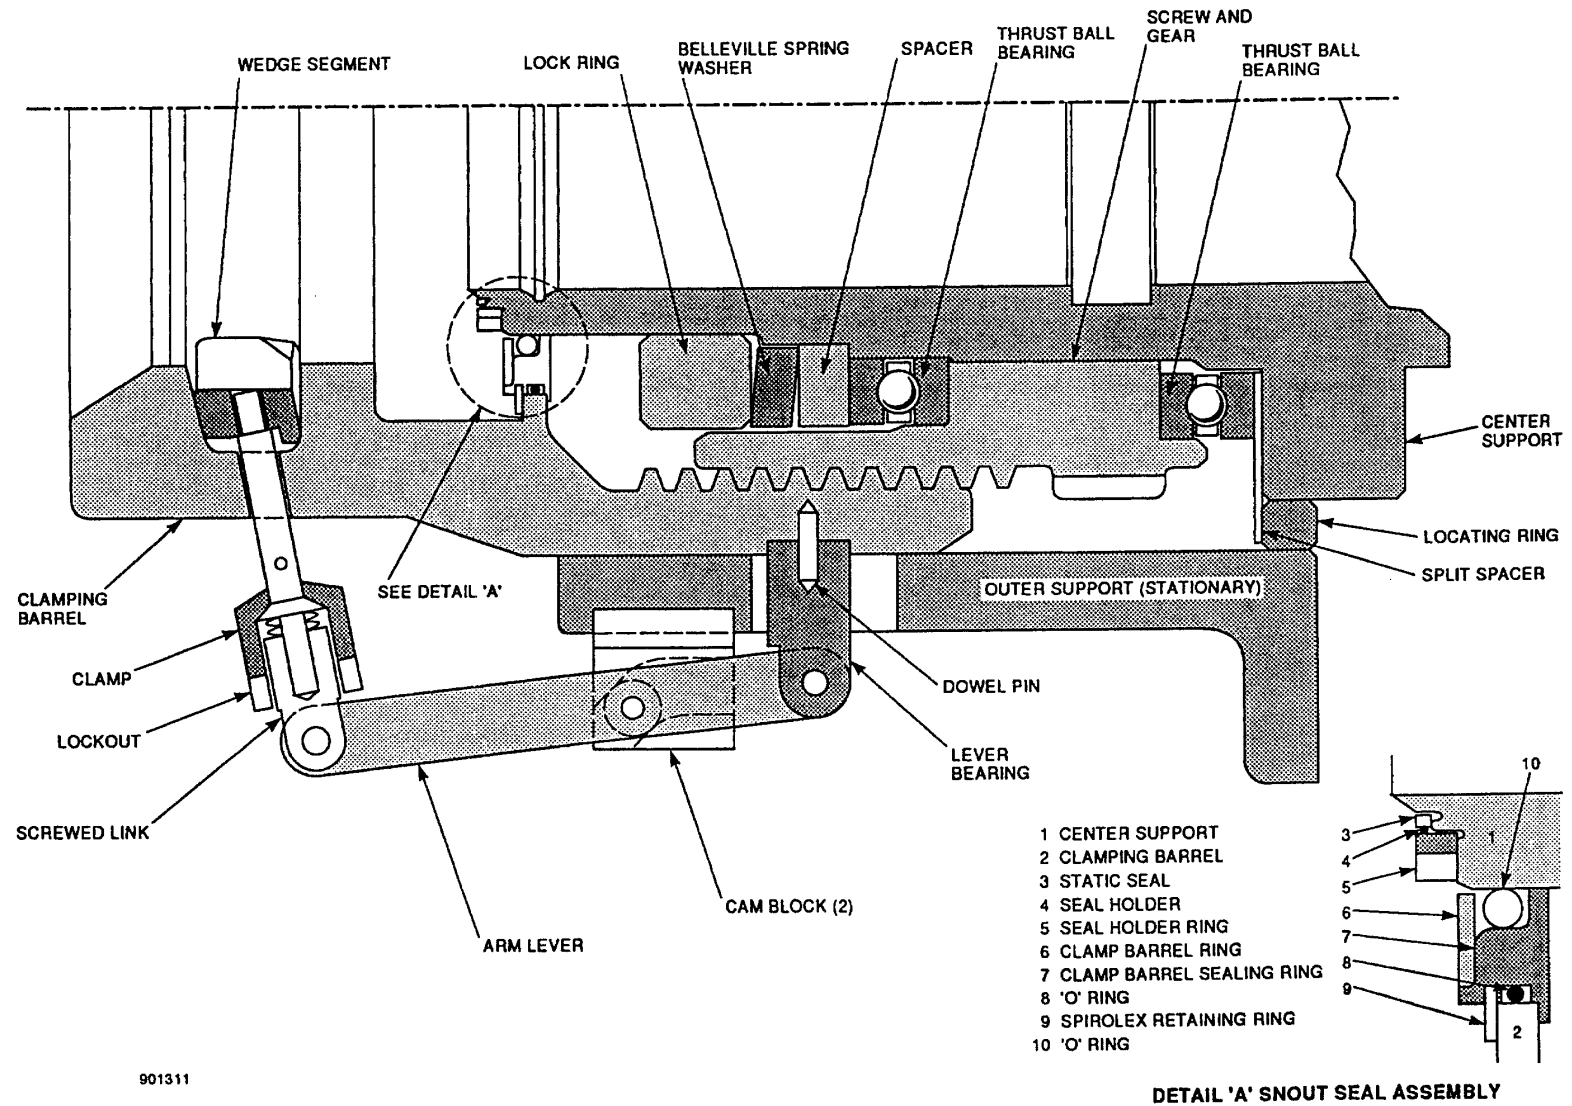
Fueling Machine Head Snout Assembly (Sectional View)
